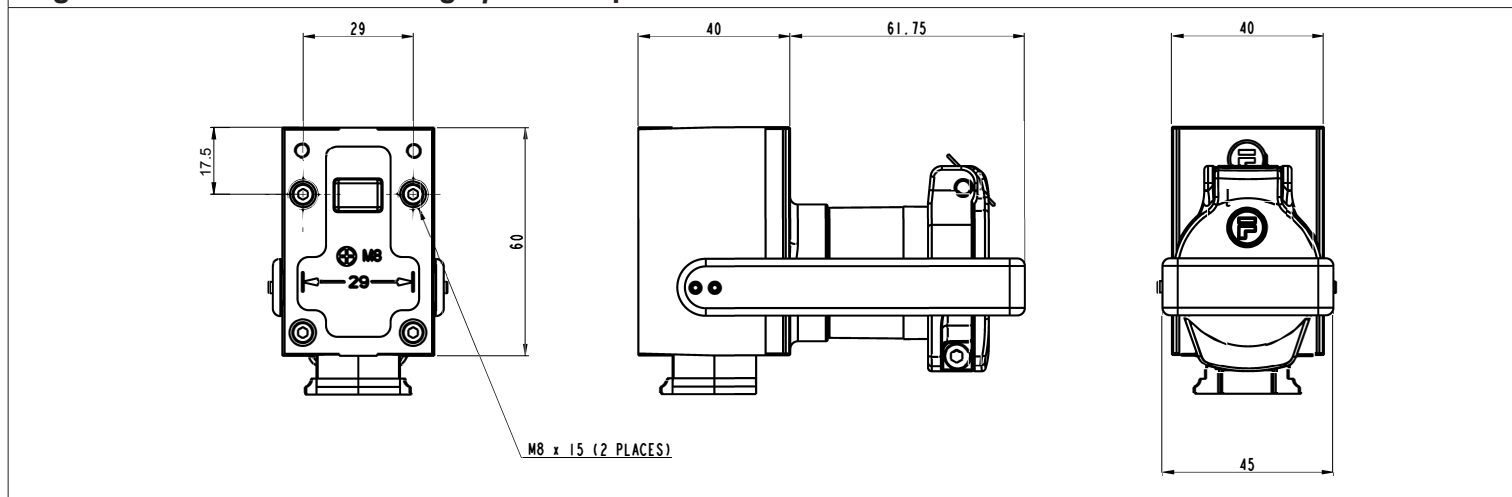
Dimensional Drawing - proE Adaptor with Standard Dustcover
